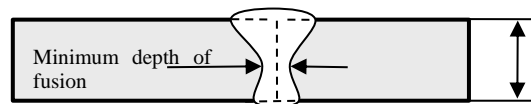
Measurement of minimum depth of fusion within the weld joint
